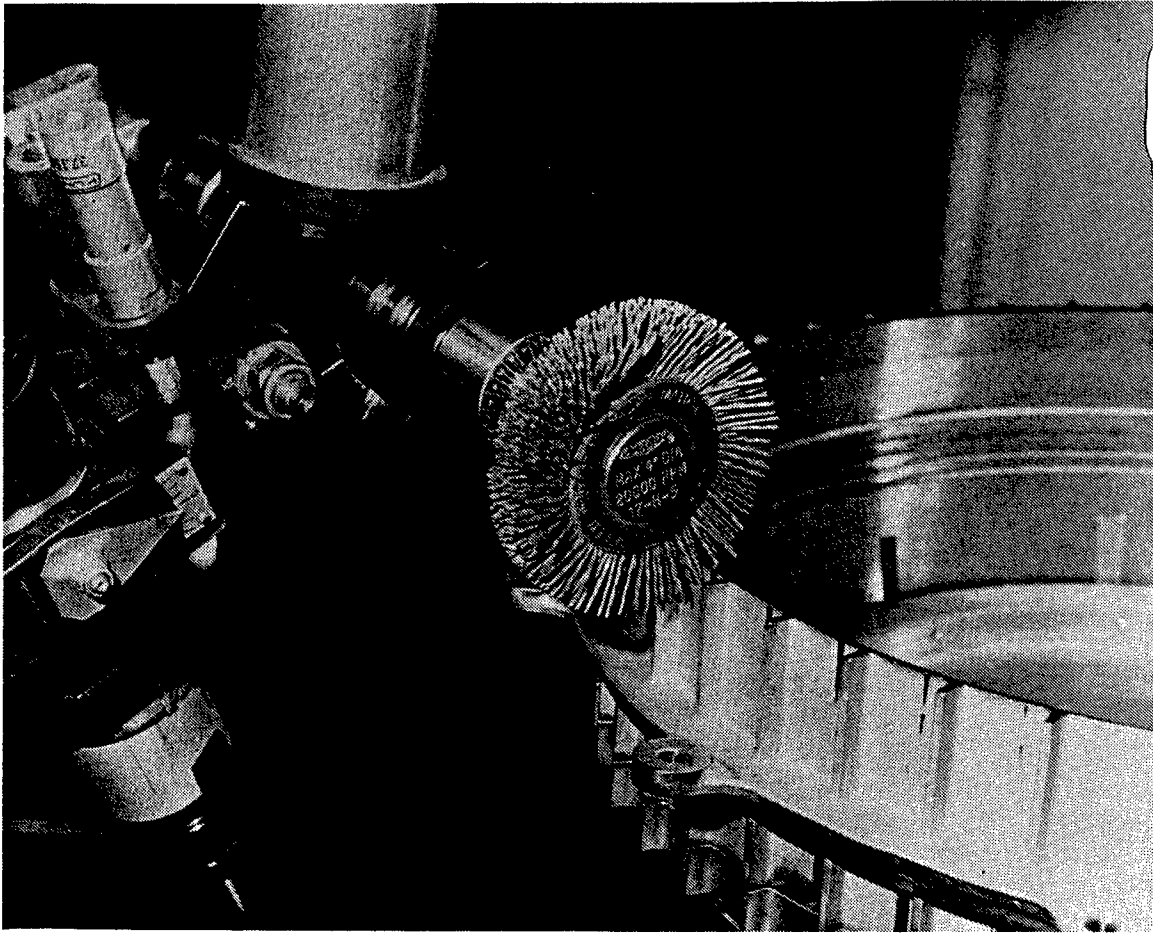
Removal of Secondary Burrs, Outer Shroud
